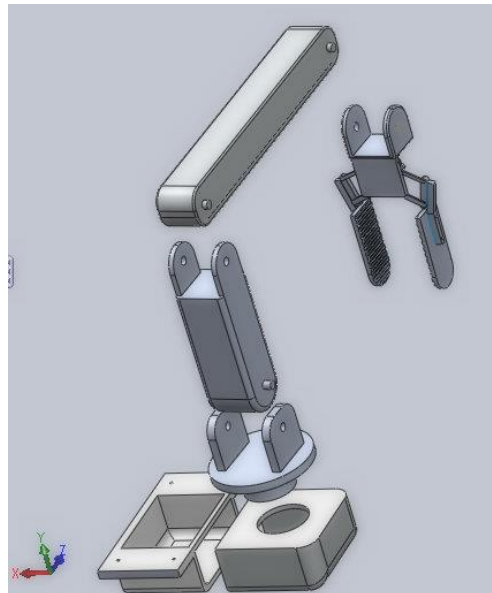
Robotic manipulator arm assembly exploded view.
